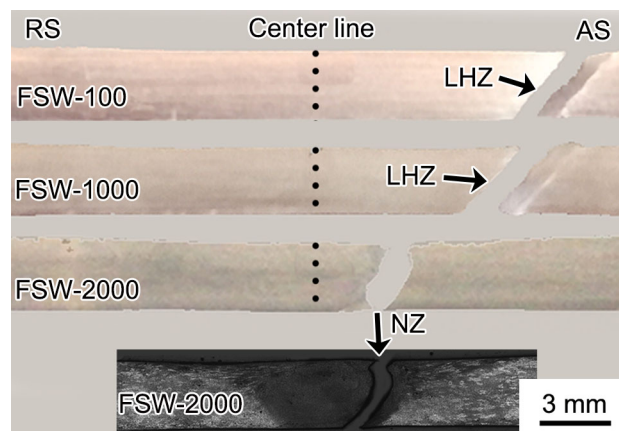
Fracture locations of FSW SiCp/6092Al joints
